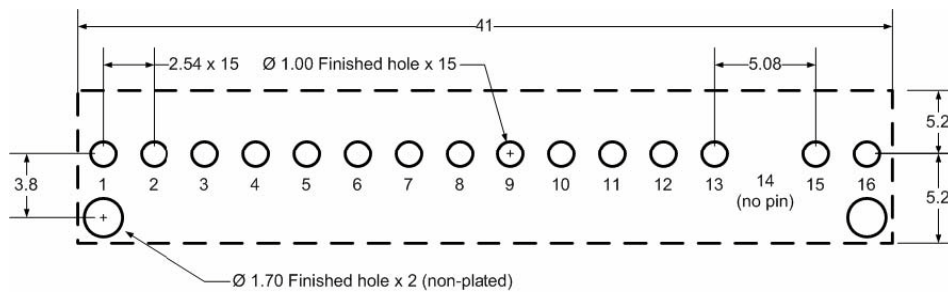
Recommended Footprint – Top View (all dimensions in mm)
